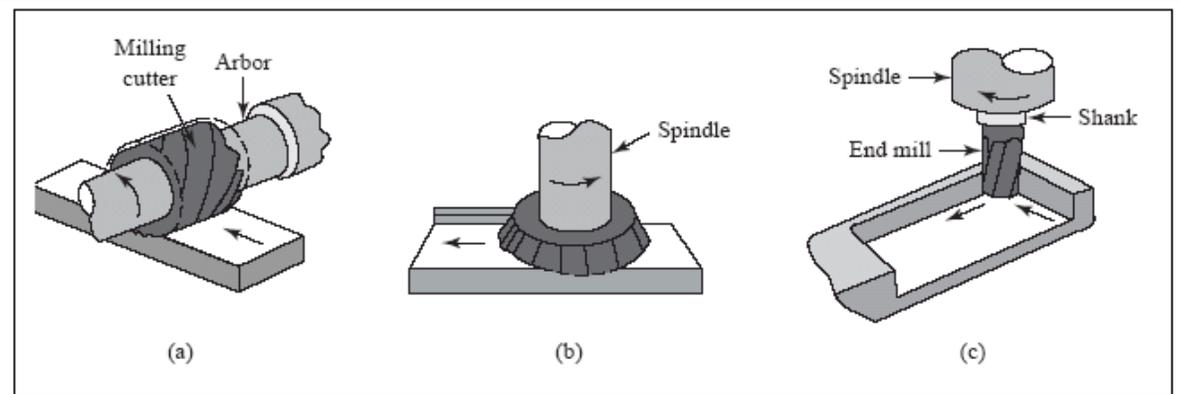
The three basic milling operations: (a) milling, (b) face milling, (c) end milling
